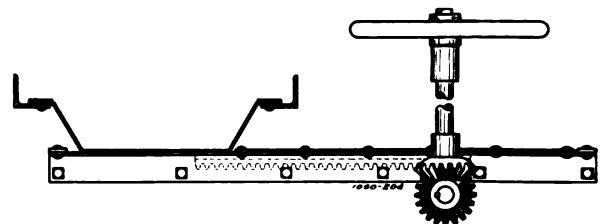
Bevel Gear operated Rack and Pinion Valve, vertical operating Shaft.
